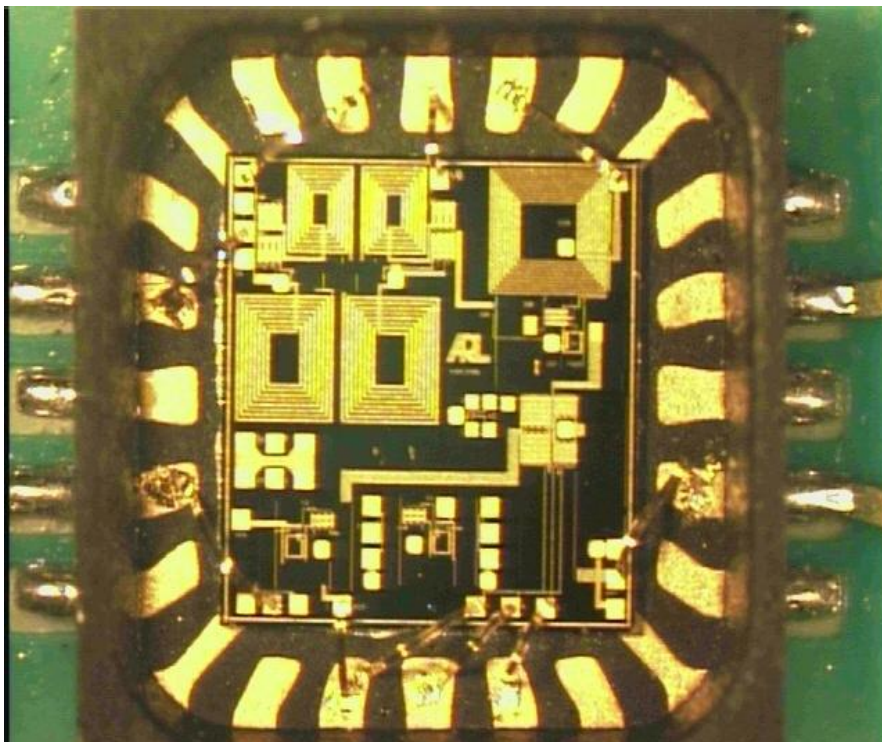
ARL24DB assembled in a 4x4mm QFN package.
